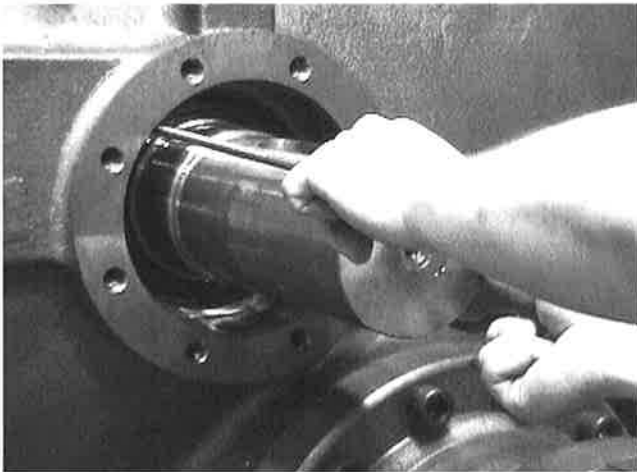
S6 Rotary side seal ring assembly with threaded jig
